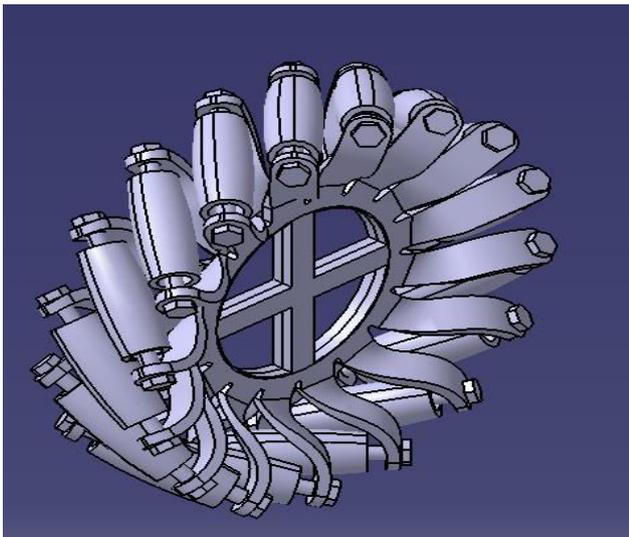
Modified Mecanum Wheel 1 Designed in CATIA
